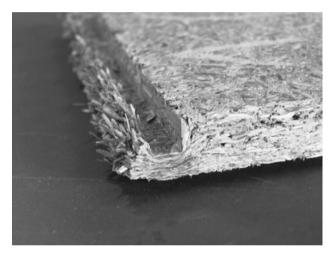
Edge of the board hot-pressed while placing the metal frame
